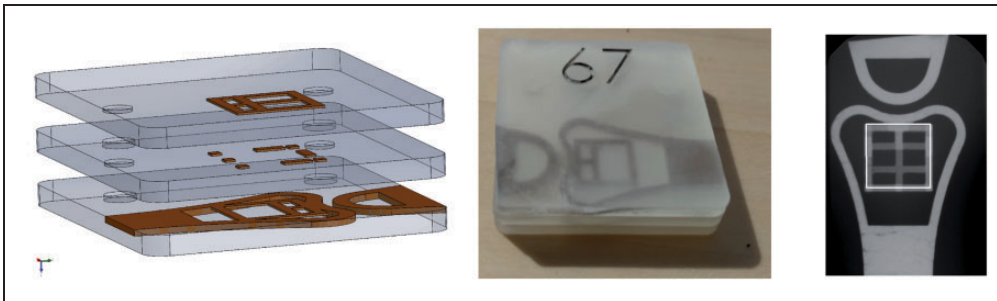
Type-C chips. Left: CAD drawing. Center: 3D printed chip. Right: radiogram.
